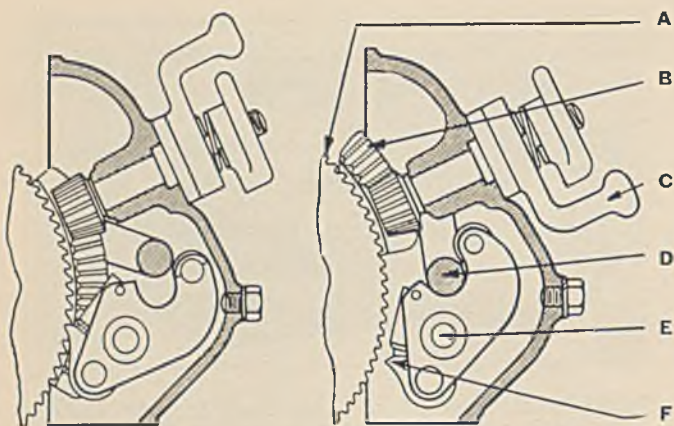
Rope Release Gear: shewing Stop Pawl engaged and withdrawn.
